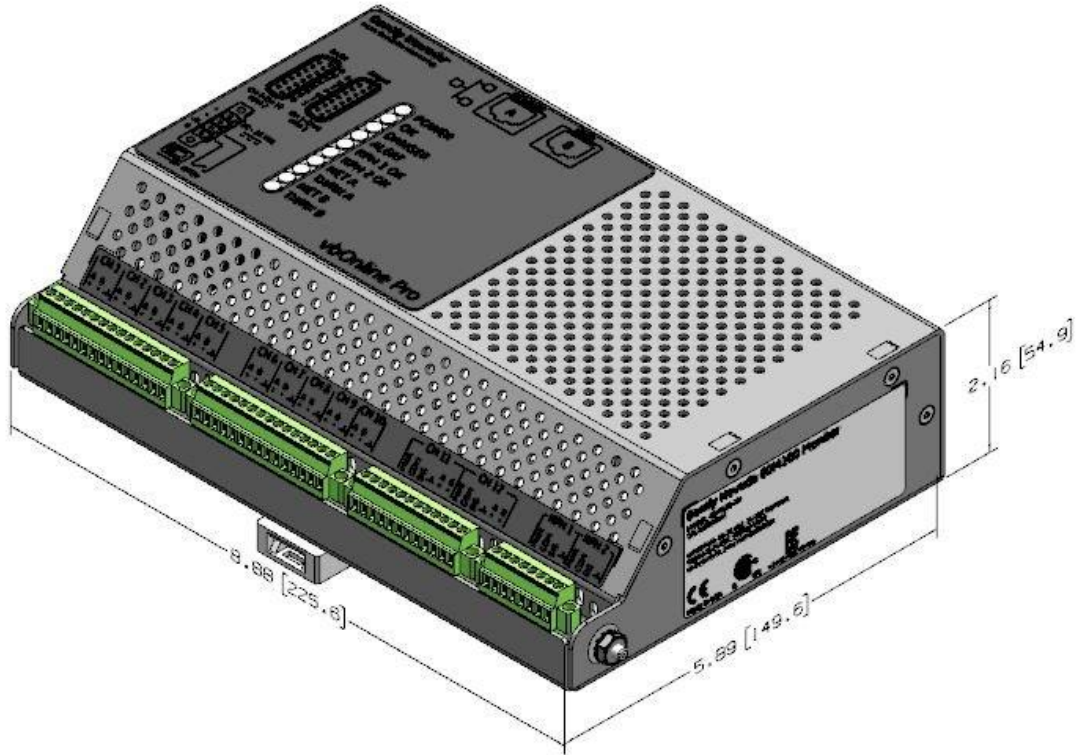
vbOnline Pro Dimensions in inches [millimetres]
